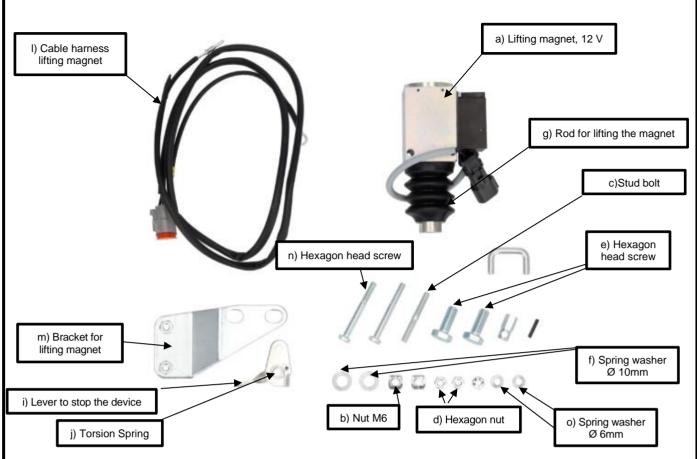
Lifting magnet 12V, 2G40, engine switch off kit
